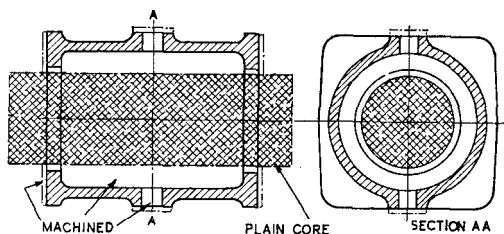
Plain cored casting for water jacket, to be chambered by machining
